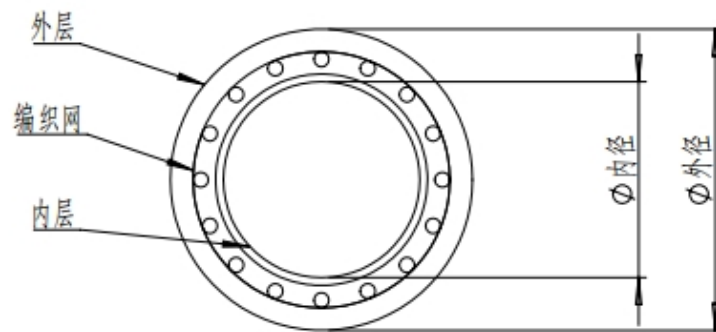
Cross-sectional view of the Shaft (Sectional View A)
